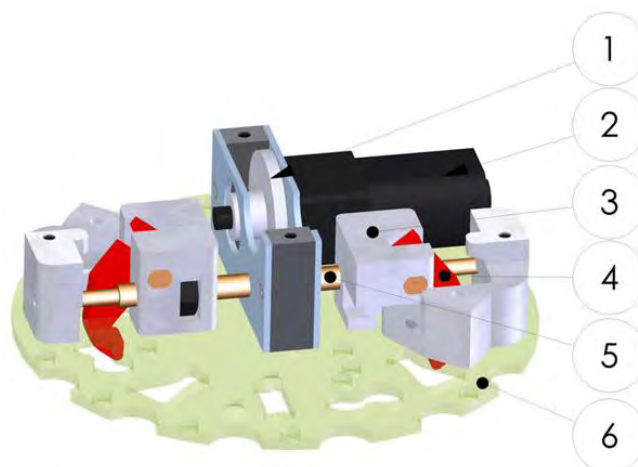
The CAD view of the Roombot coupling mechanism [16]: (1) First piston, (2) Mini-motor-gearbox, (3) Slider moving the latches, (4) Latch, made from fibre-reinforced plastic, (5) Worm gear, (6) Genderless connector plate.
